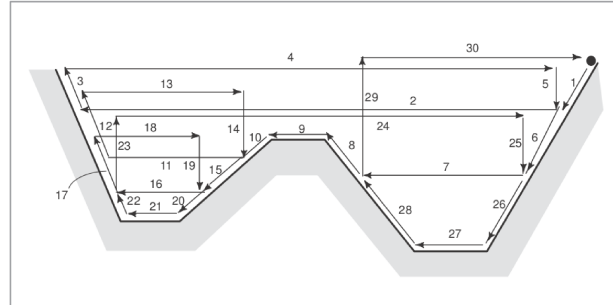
(f) Cutting path in stock removal in facing
